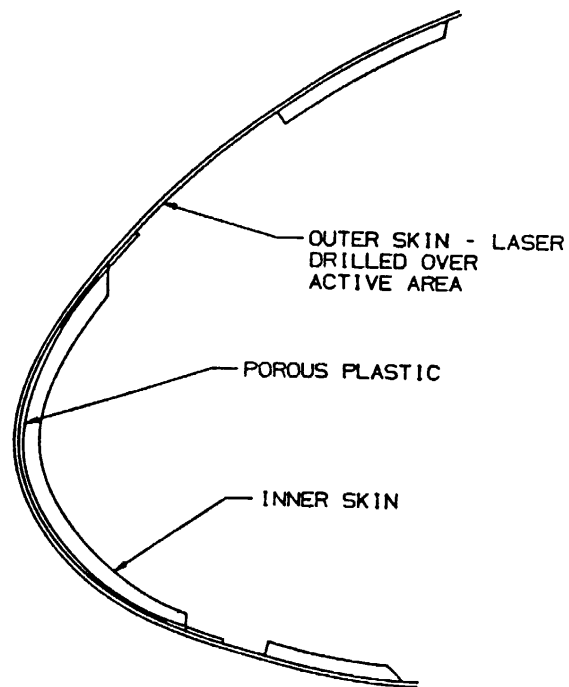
CROSS SECTION OF A TYPICAL POROUS PANEL
